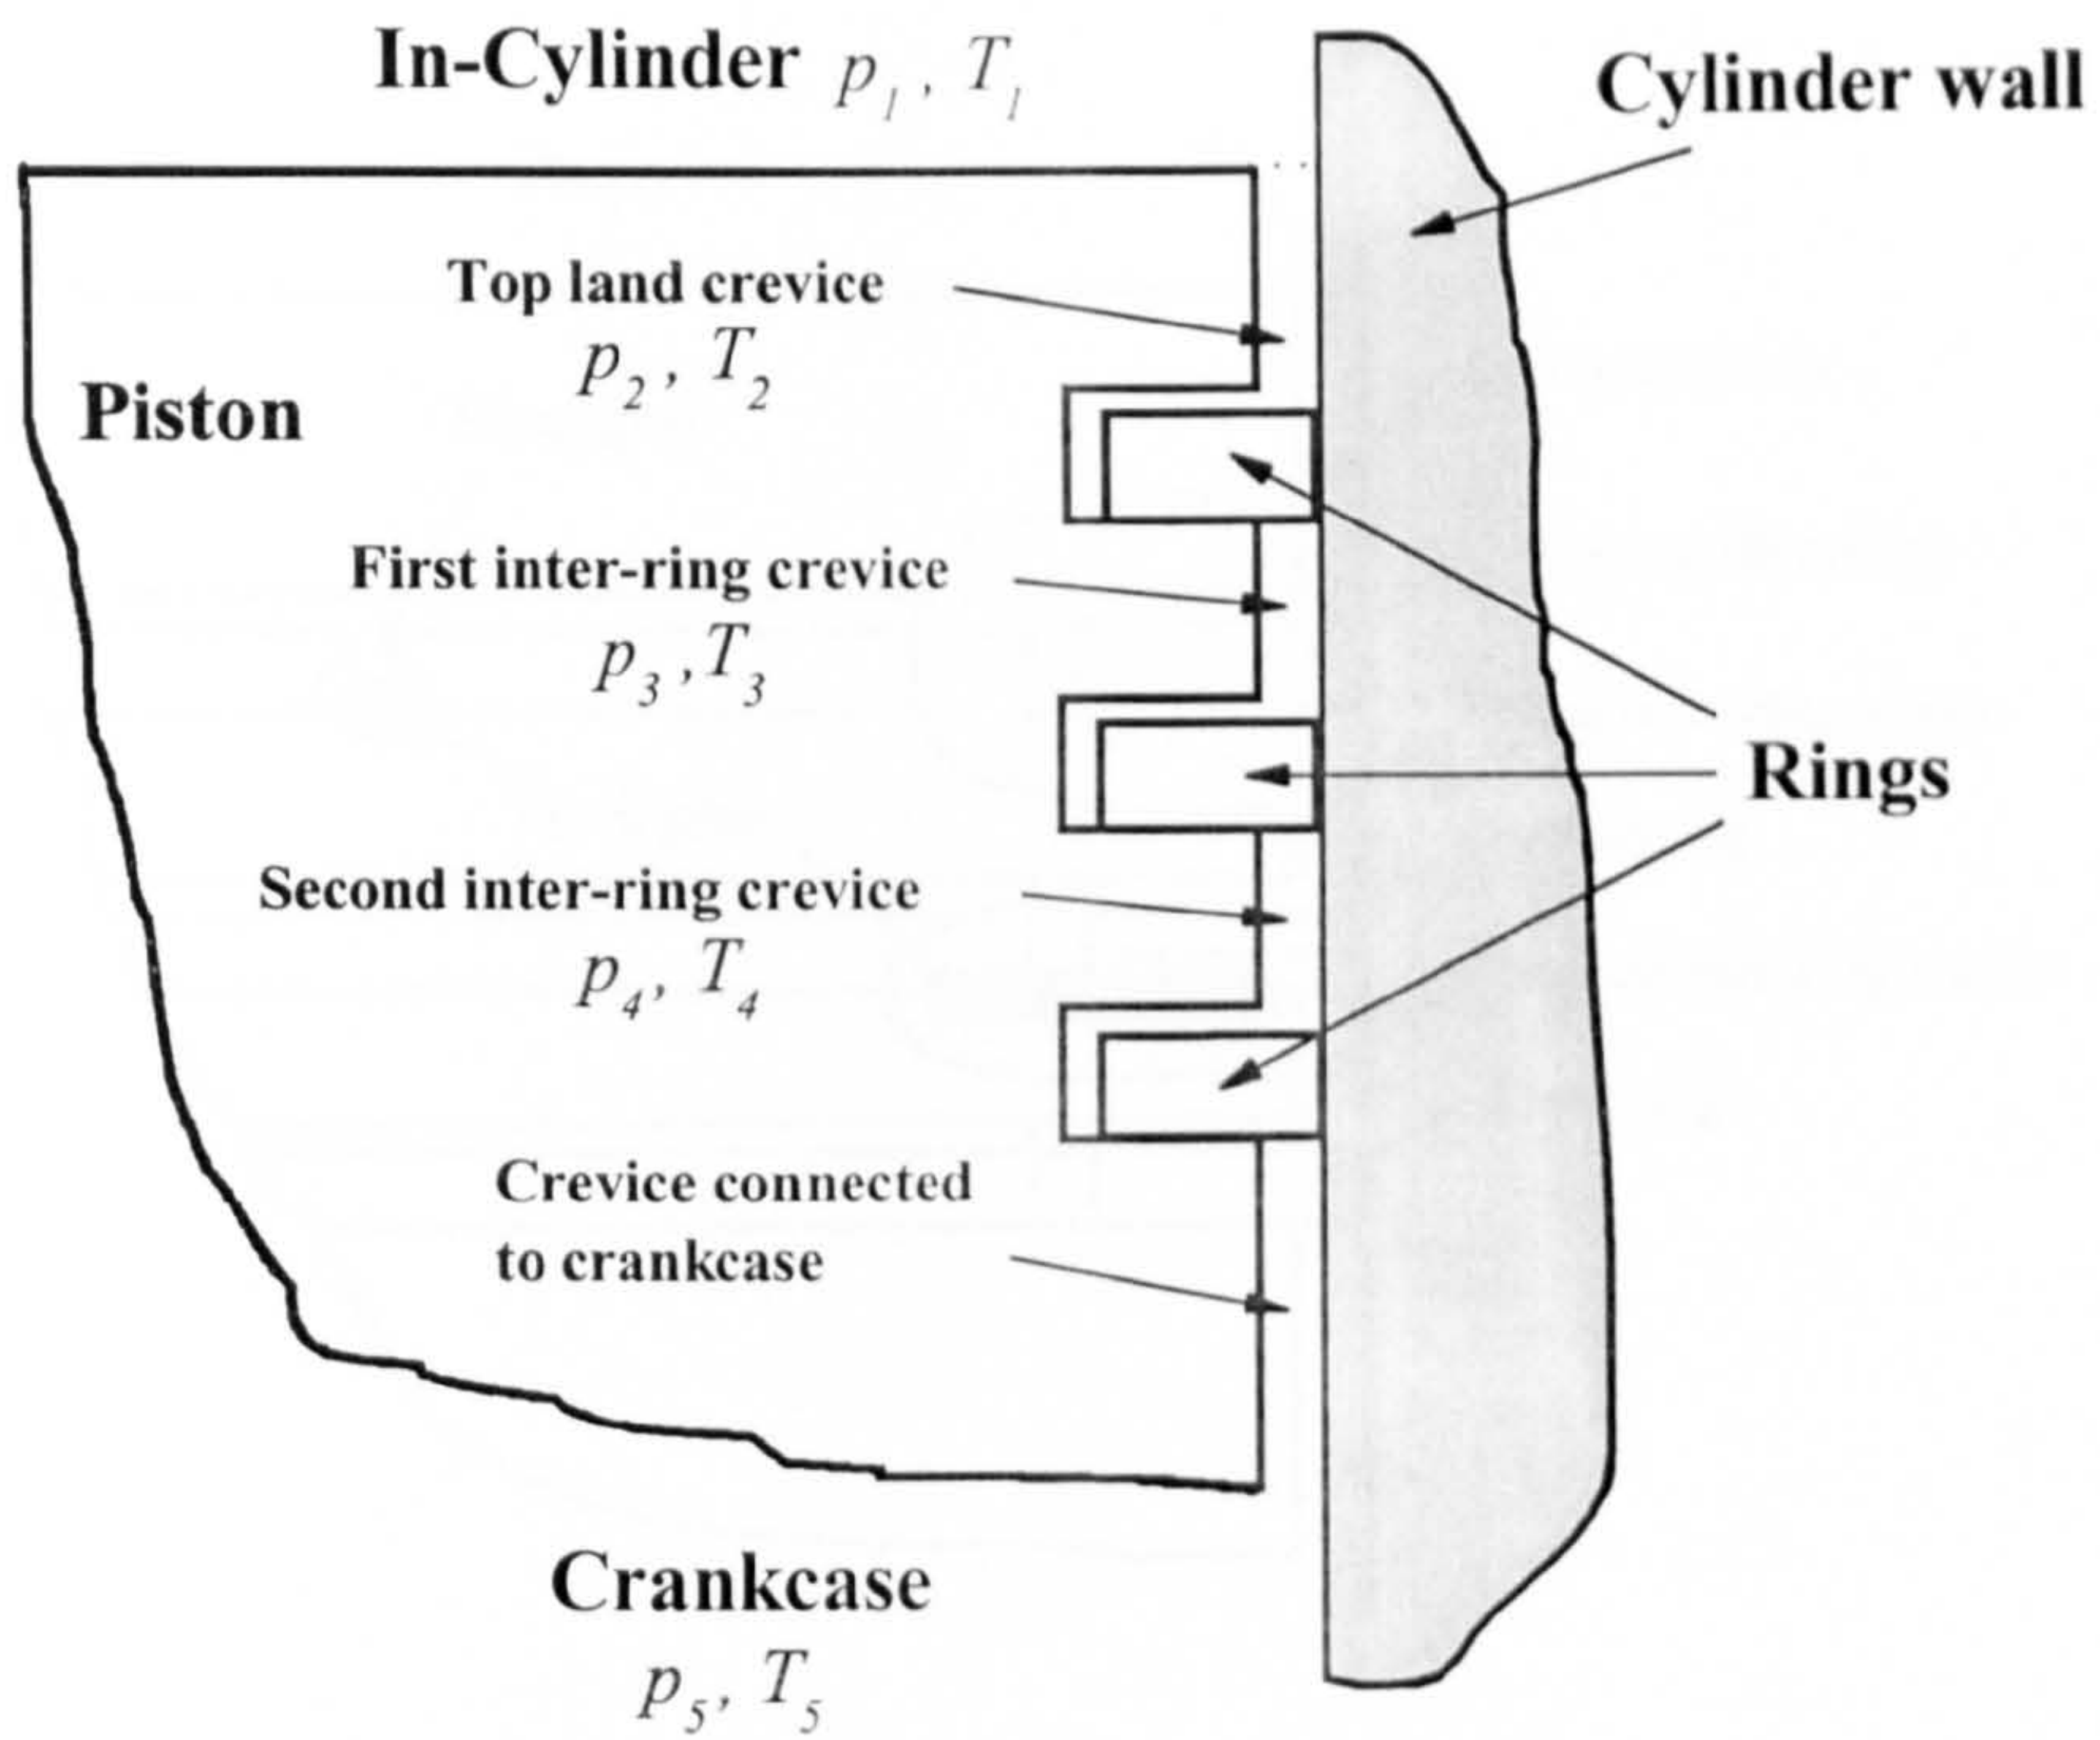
Three-ring-piston assembly used in the LUPOE1 engine.
